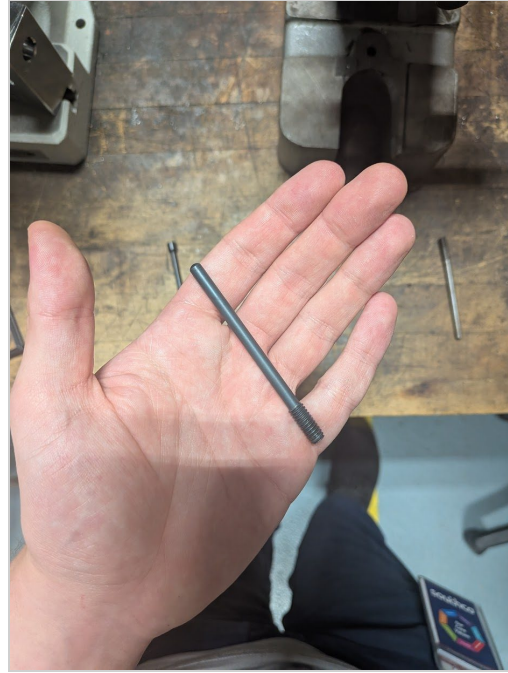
One of the three press pins I made to mount on the arbor press and push the pins out of the parts.
